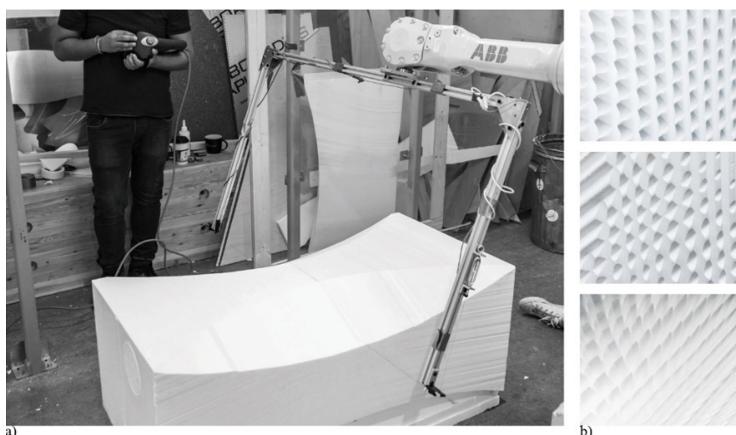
a) Custom built adjustable T-slot robot mounted hot-wire cutter b) various lighting and textural effects from different cut angles and frequency
